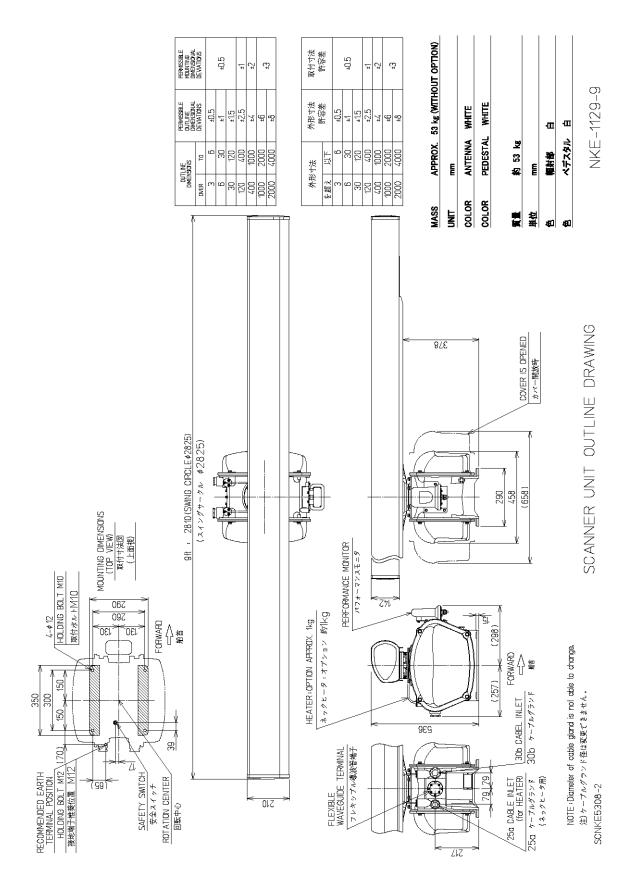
Outline Drawing of Scanner Unit, Type NKE-1129-9
